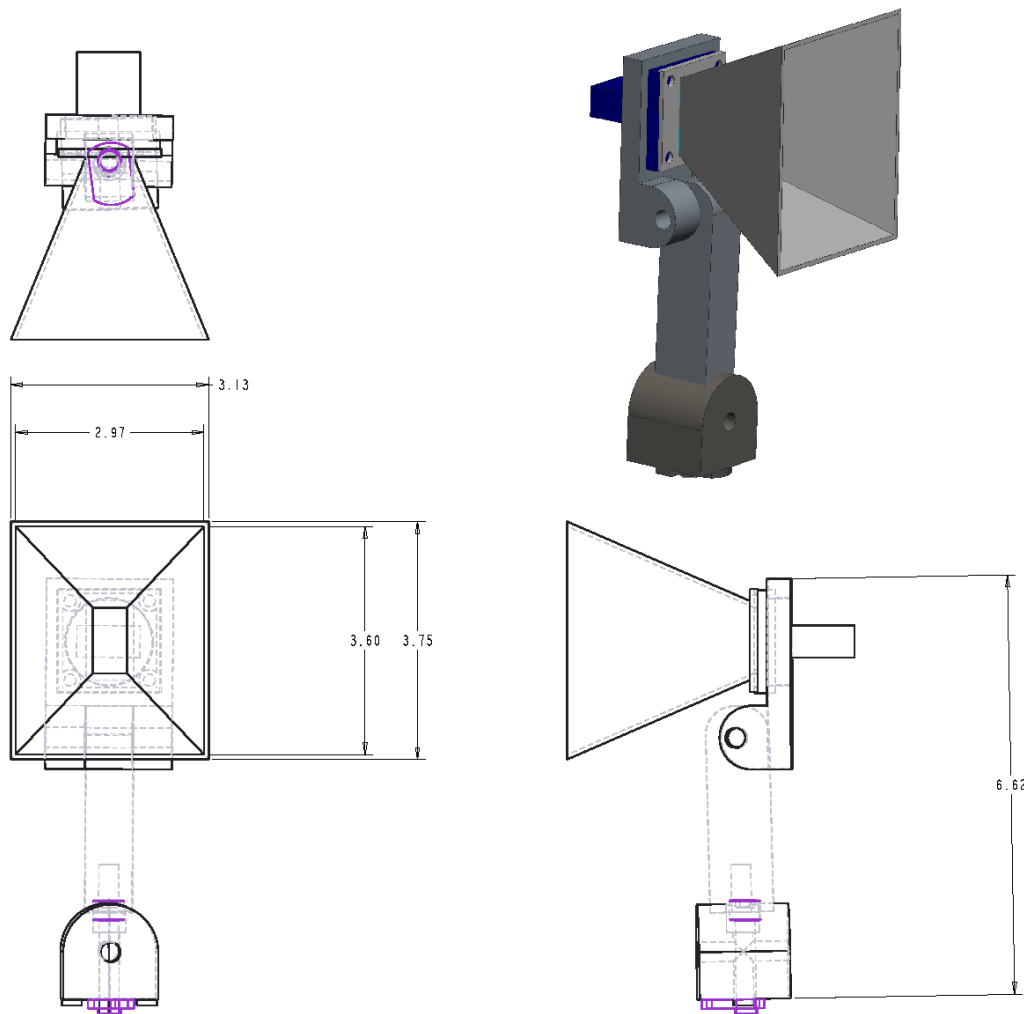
Design H-2, 3D and Detailed Drawings in Inches
